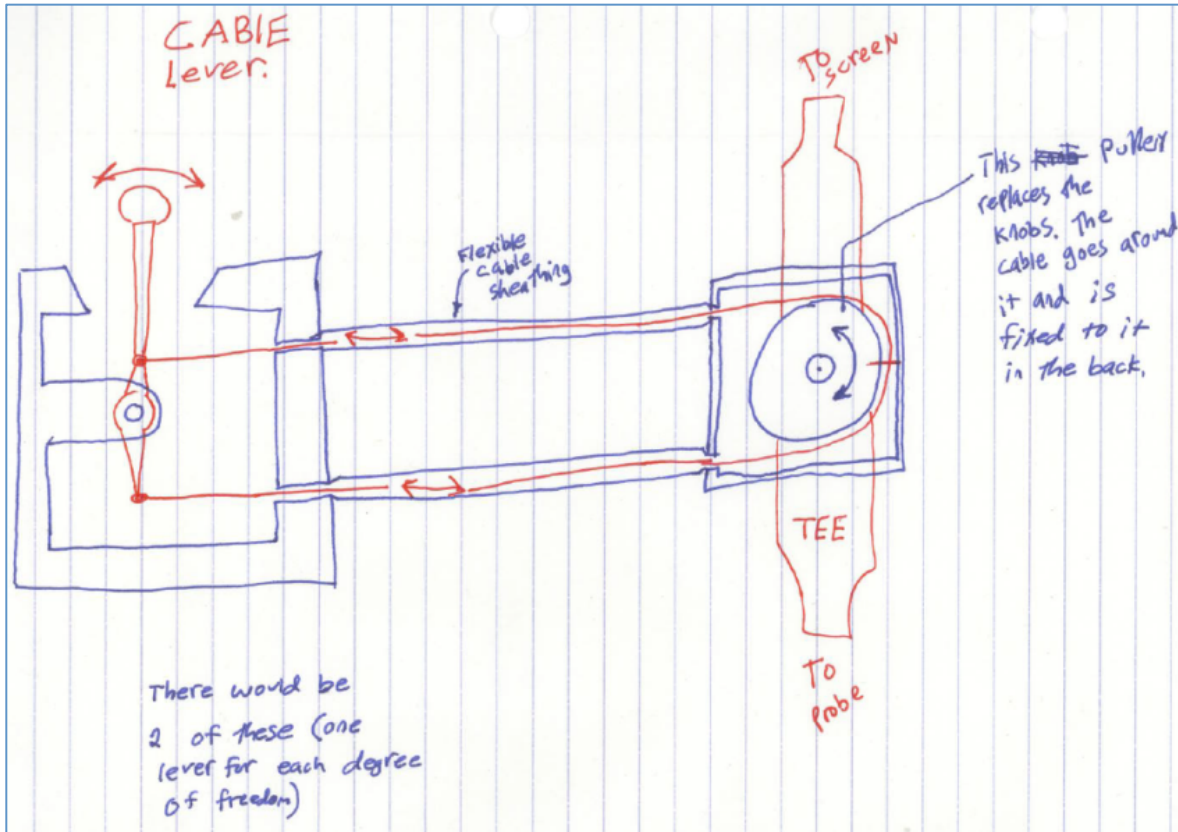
Rocker handle cable system. The user interface of this system would be a lever that can rotate back and forth. The lever would actuate the movement of cables, which cause a pulley rigidly attached to the shafts of the TEE to rotate. This rotation would actuate the movement of the TEE probe.
